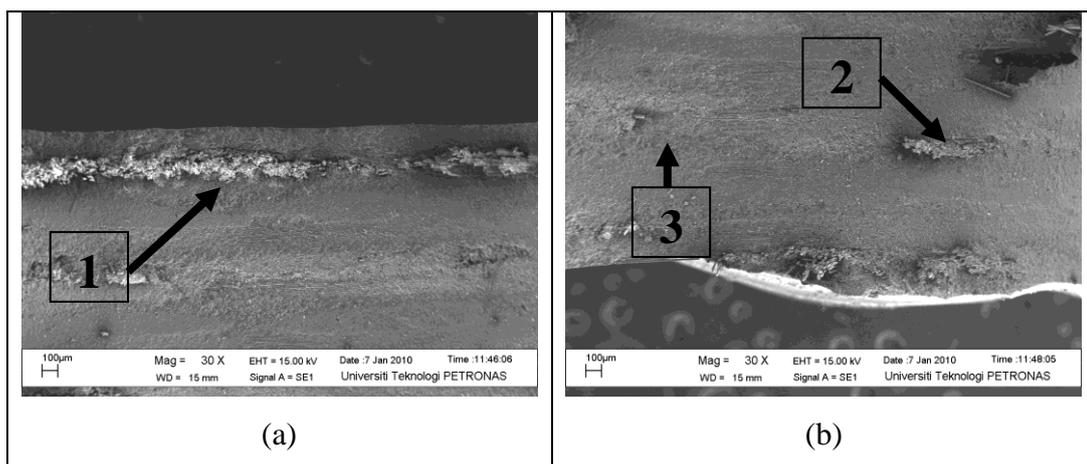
Surface microstructure of the drilled holes for 3 mm thickness GCRE (hybrid) fiber composites (a) Upper part: 1. Fiber pull-out (b) Lower part: 2. Fiber pull-out 3. Porosity.
